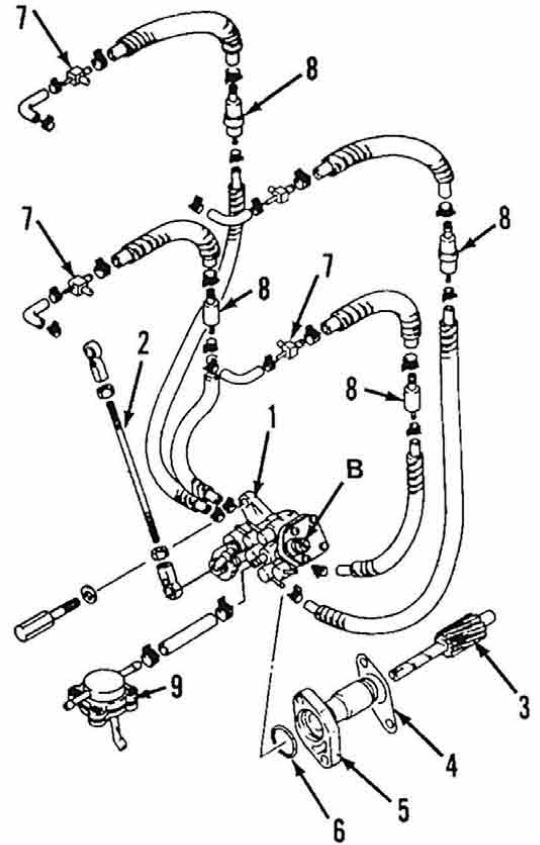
Refer to text for oil pump control rod adjustment procedure.
